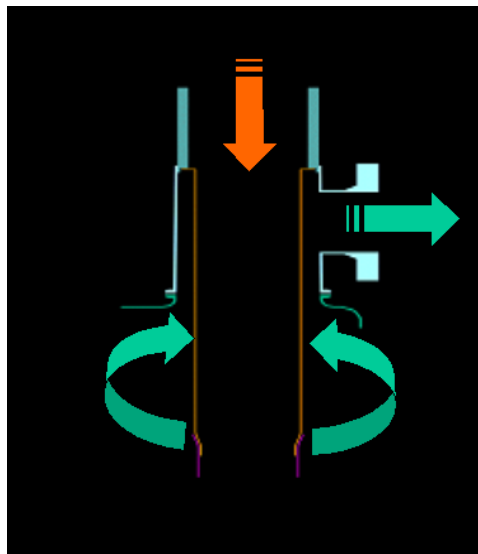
AutoCAD Drawing of Turbine Scroll Insert
